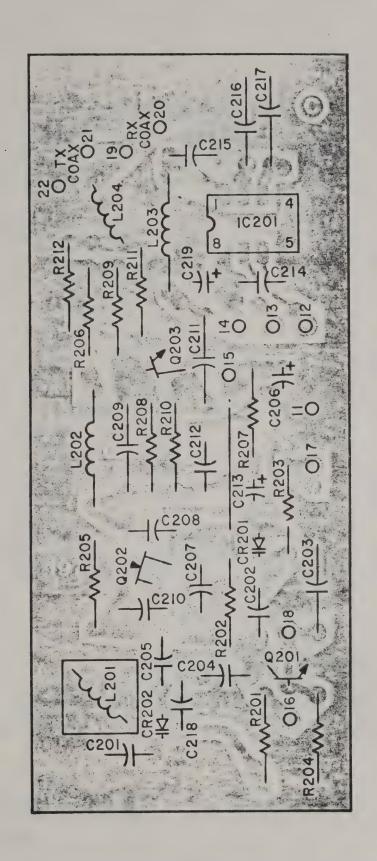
B. Parts Placement, VCO PCB Assembly; Bottom View.
